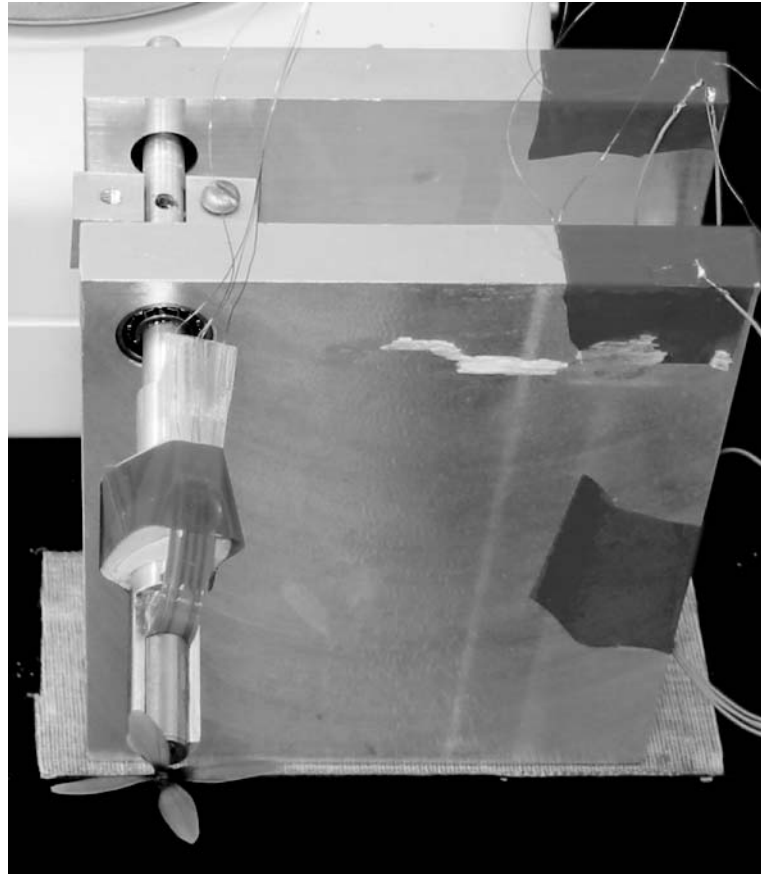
Small test fixture in the large torque testing configuration.
